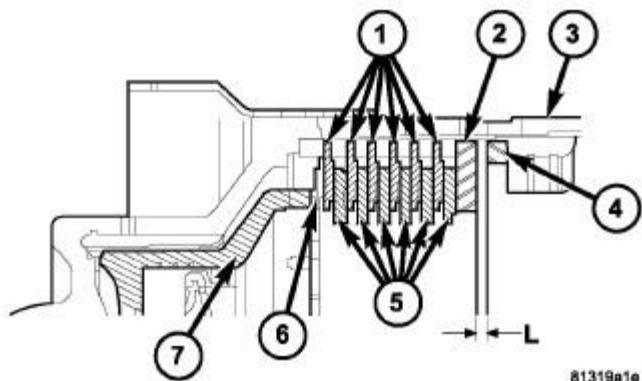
Input Clutch K1 Stack-up - Single Sided Discs
